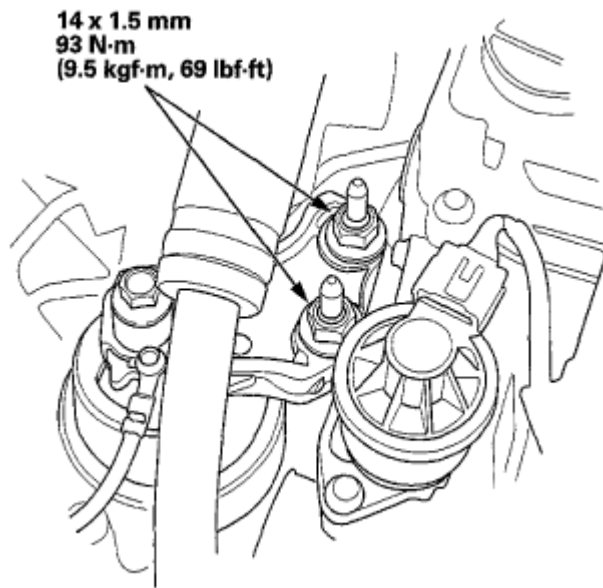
Identifying Side Engine Mount/Bracket Assembly Mounting Nuts Tighten Torques
